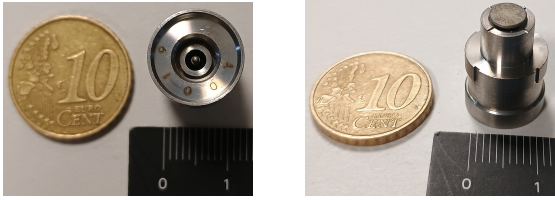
Top and bottom views of the Elettra 2.0 pickups manufactured using glass sealing technology.
